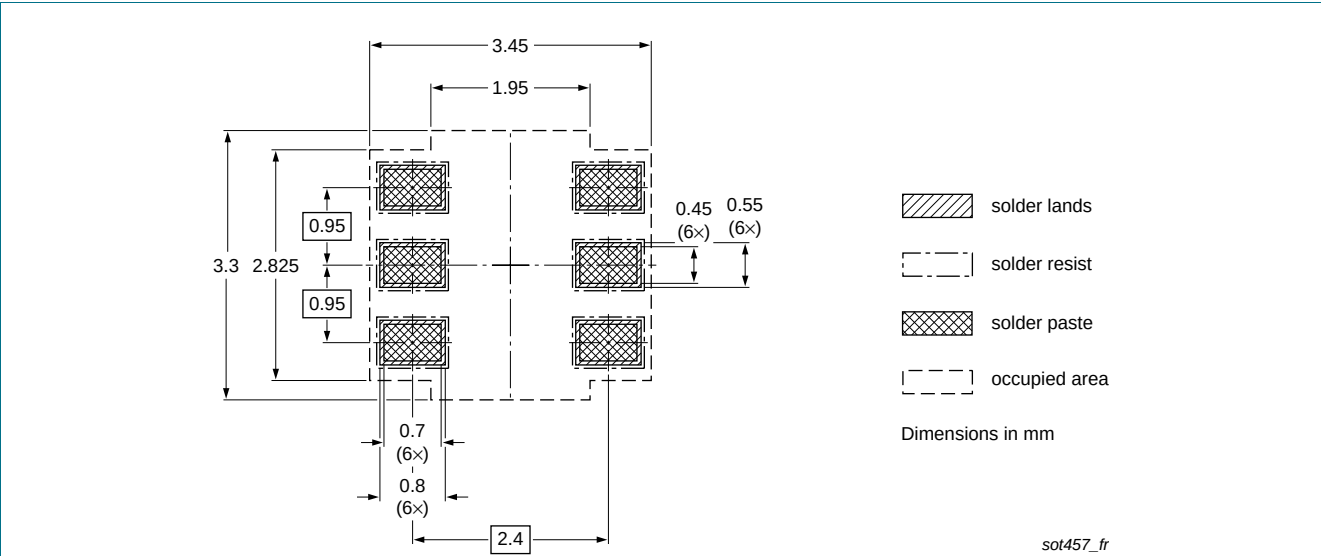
Reflow soldering footprint for SOT457 (TSOP6)
